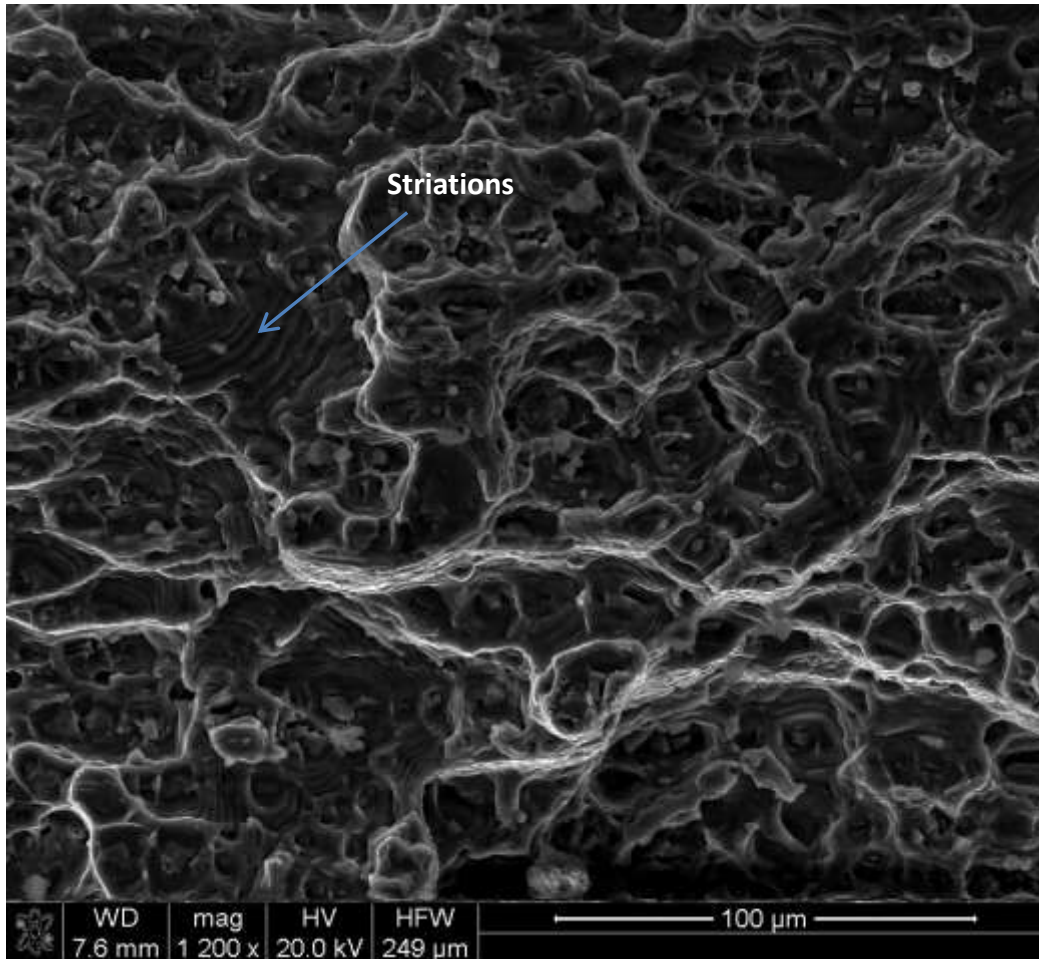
53 Fracture toughness SEM images of discontinuities in HPA welded metal
